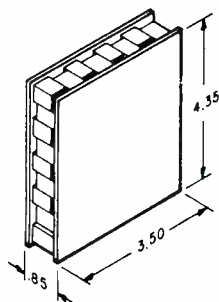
Logic-on-card package of 64 micromodules in interconnecting printed-circuit boards.
